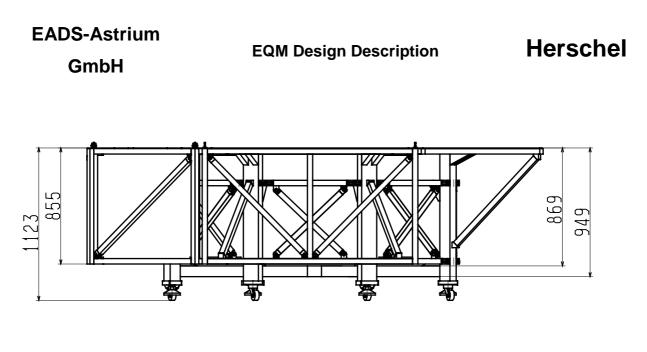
Side view SVM simulator with its basic dimensions (side/inside plates not shown)
